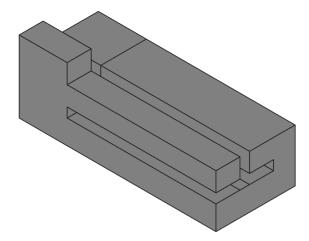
Screenshot from FreeCAD showing the fixture created to mount the AGD PCB to the device under test platform
